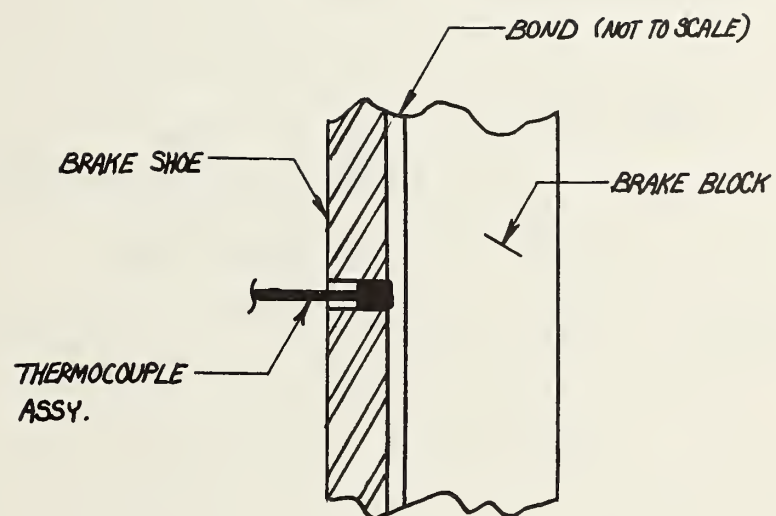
TYPICAL BRAKE SHOE THERMOCOUPLE INSTALLATION, SECTION VIEW
